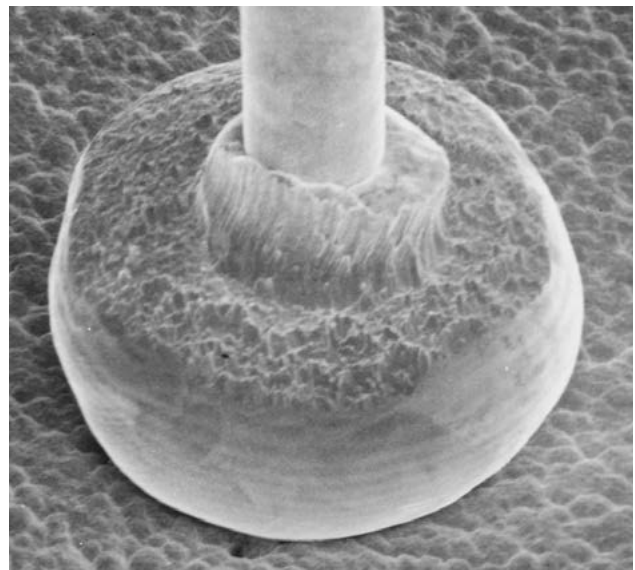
Example of a ball bond made with a worn capillary. Wear can be caused by EFO damage, physical wear (high bond count), or metallization build-up inside the chamfer of the capillary.
